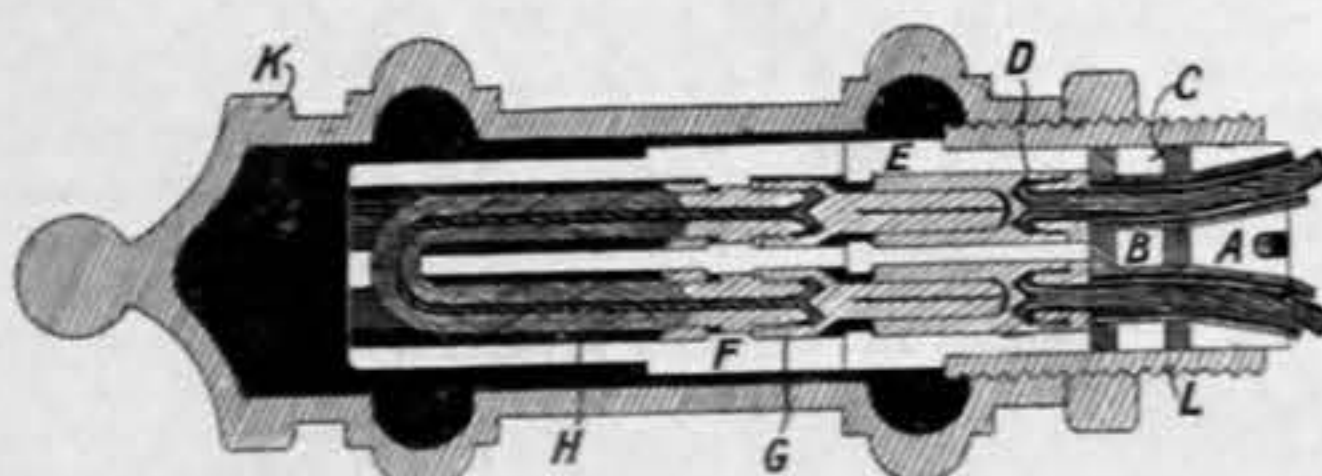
HOSE COUPLING WITH SCREW ATTACHMENT
